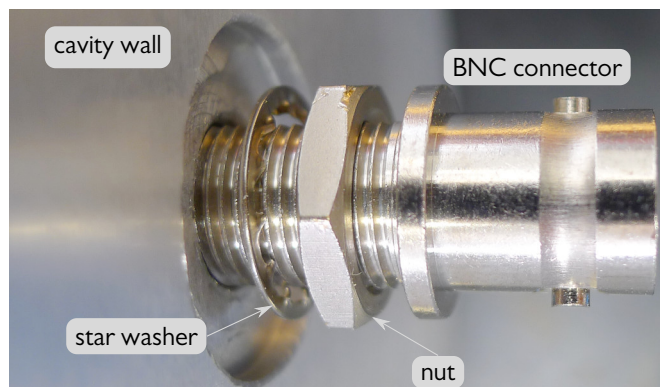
Closeup of mounting a BNC connector, which can be locked by the nut squeezing against the star washer.
